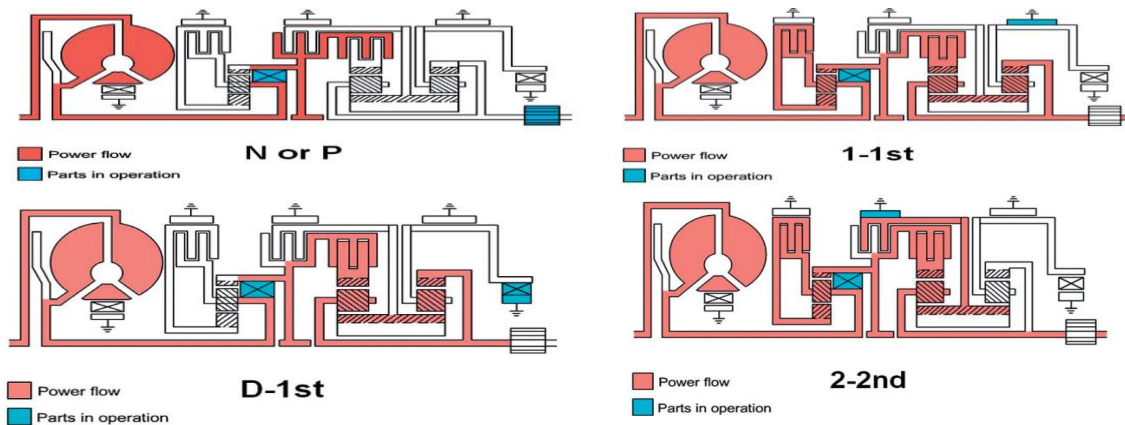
N, P, 1st, 2nd sample gear with selector in position
